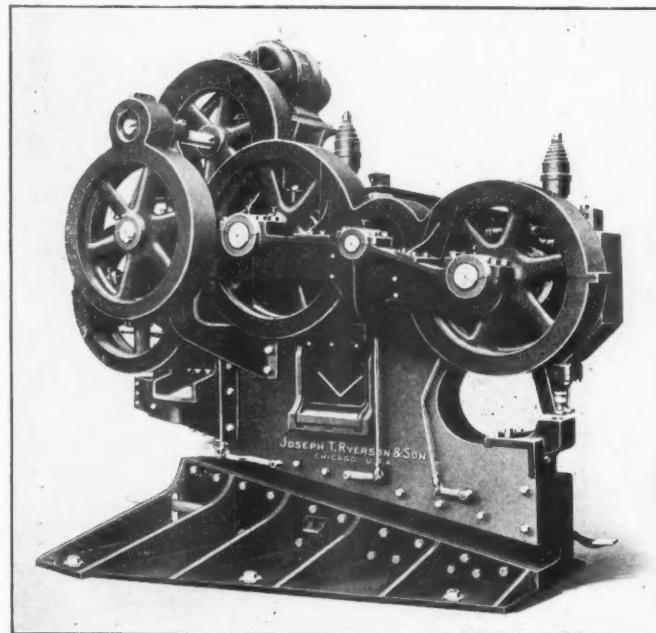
Back View Showing Arrangement of Overhanging Machine Parts.
